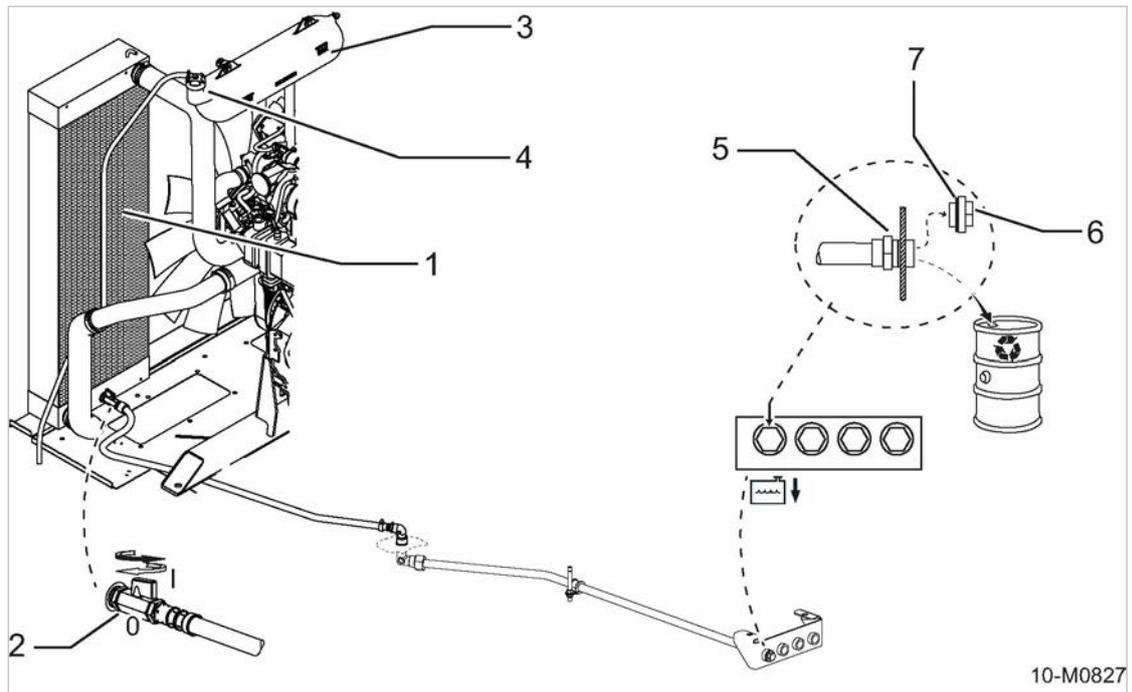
Draining the coolant from the engine coolant cooler (closed floor pan/stationary machine)
